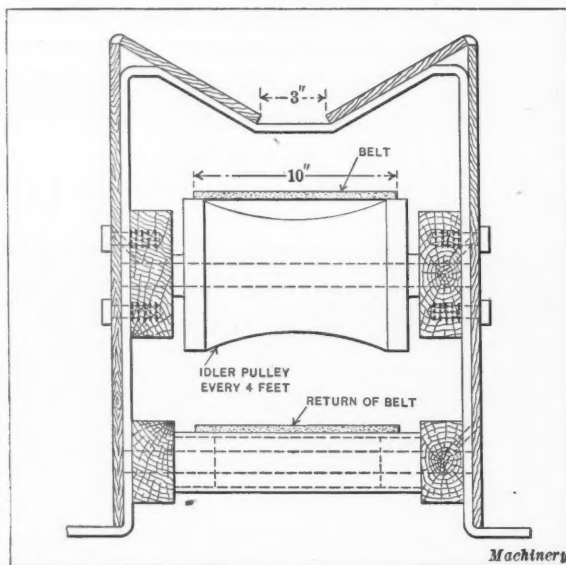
Arrangement of Belt Conveyor carrying Chips from Machines
